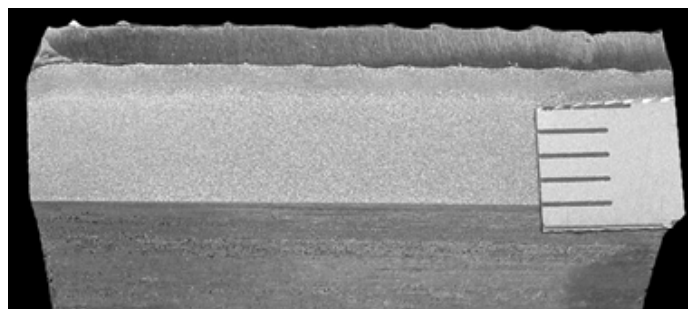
Macrostructure of the tube ($\varnothing 44.5 \times 5.0$) mm made of steel 13CrMo4-5 with the one-layer overlay weld made of nickel alloy Inconel 625; surfacing performed with the simultaneous cooling of the tube inside
